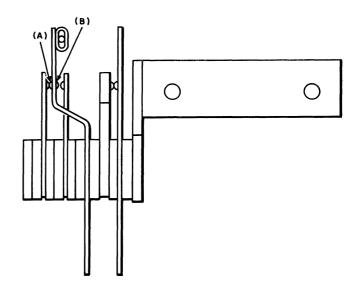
Rotary Interrupter Spring Assembly with Offset Spring
